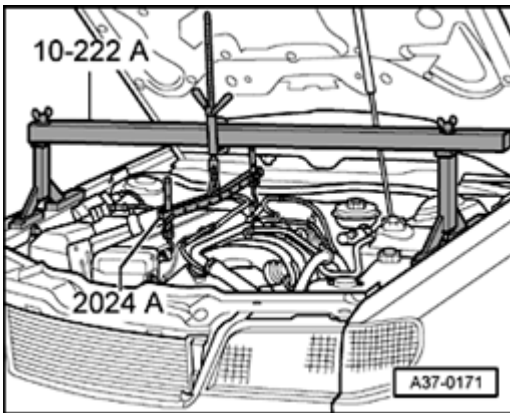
Placing Support Bar 10-222A On Fender Mounting Flange
